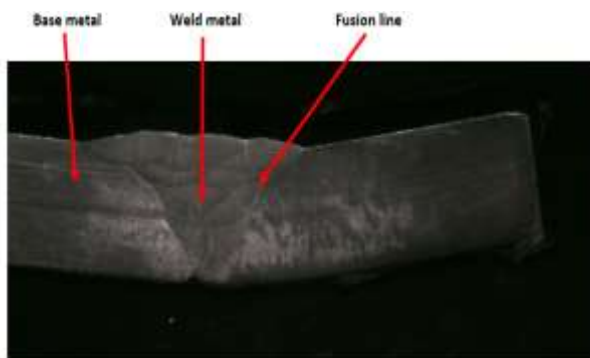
Macroprofile of stainless steel welded at heat input of 2030 J/mm.
